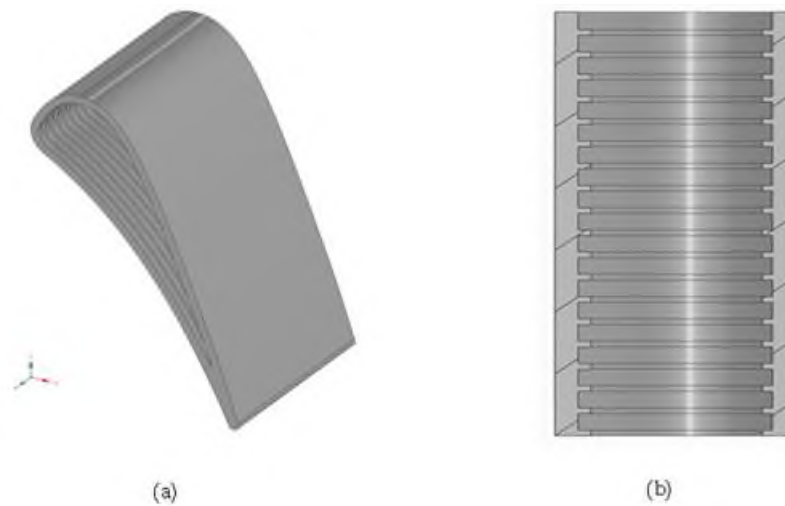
(a) turbine blade with rib turbulator, (b) cross-section of rib turbulator design.
